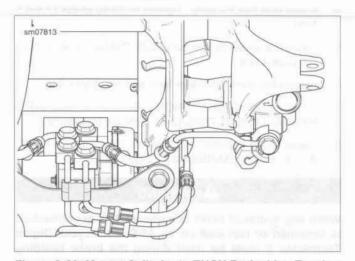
Master Cylinder to EHCU Brake Line Routing
